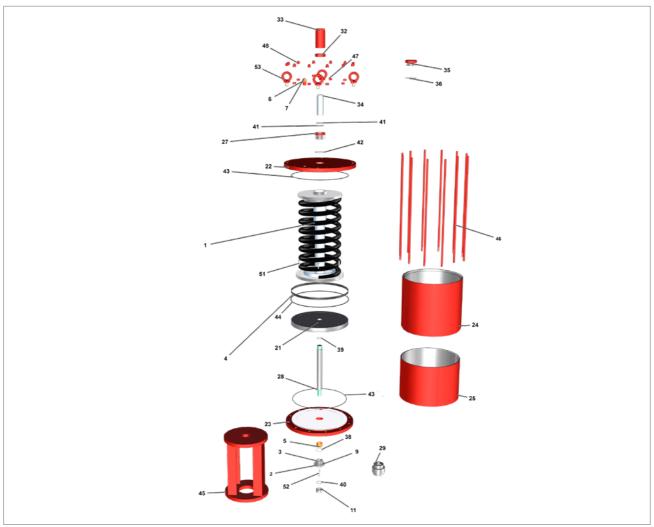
Linear pneumatic actuator type 1 / type 2 spring down
